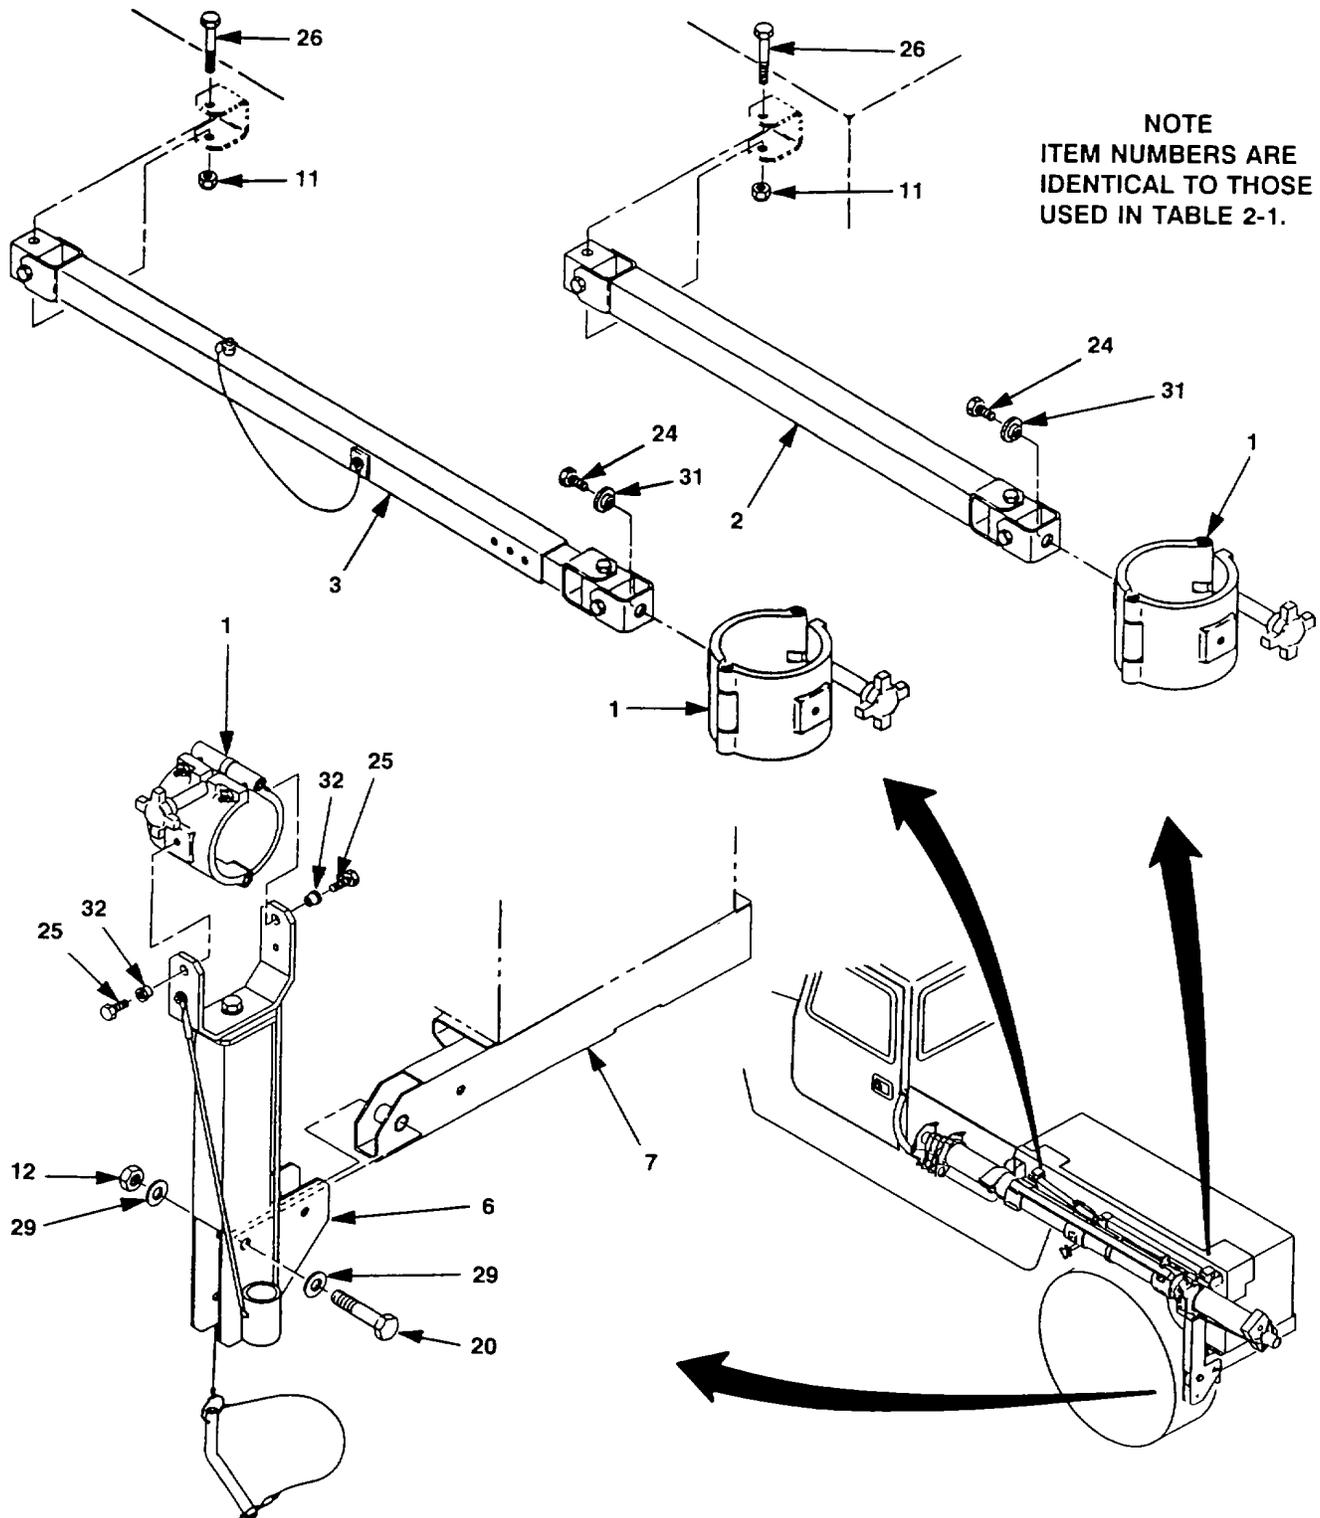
Universal; HMMWV Mounting Kit and Mast Installation (Sheet 3 of \$)
